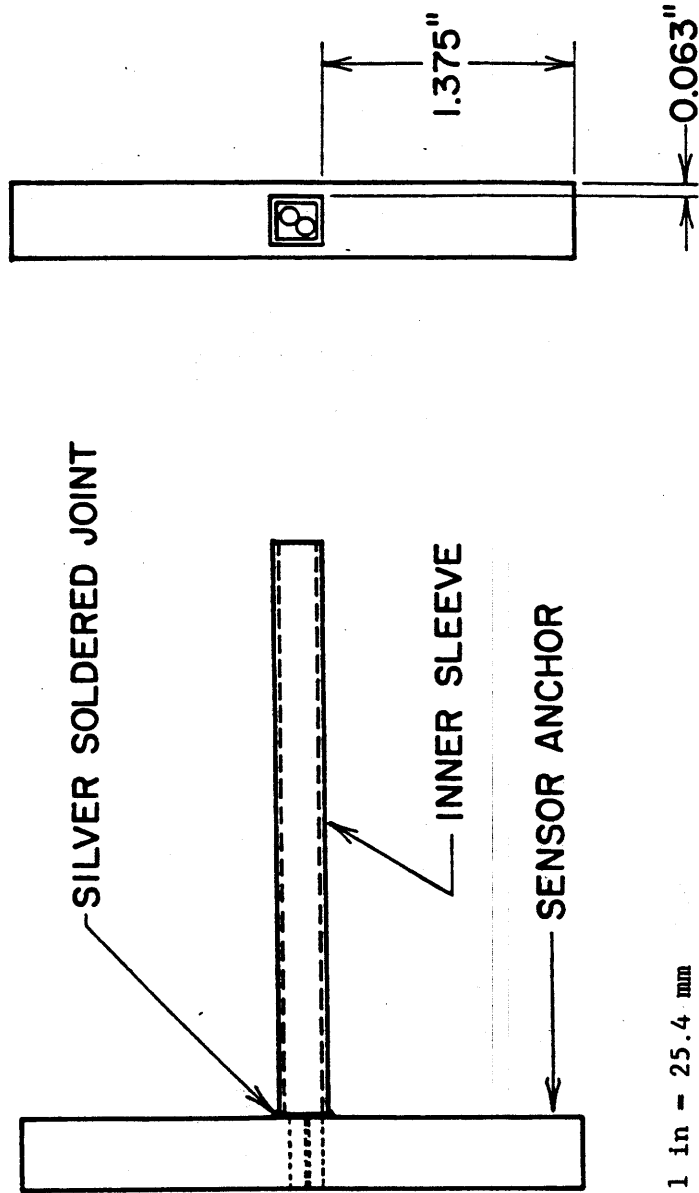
Completed sensor assembly drawings--asphalt transducer.
